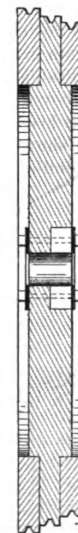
Section of Fly Wheel.—Scale, one-eighth full size.
